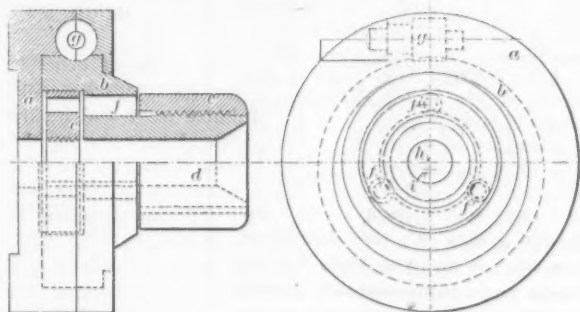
Details of the Construction of the Jarvis Drawing-In Chuck.
